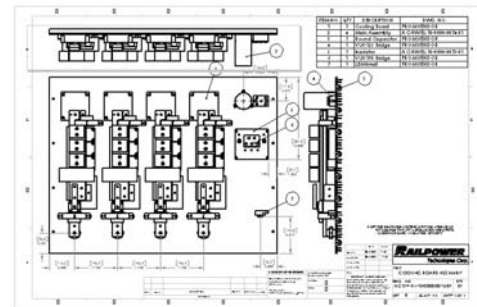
Drawing of Green Kid electronics cooling board assembly
